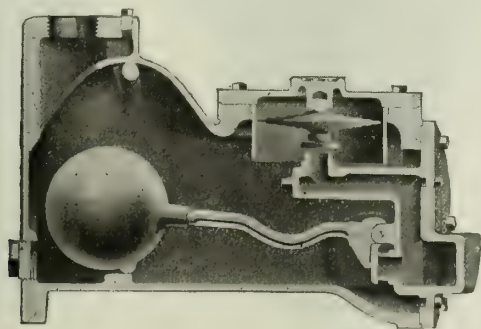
DUNHAM NO. 6 BLAST TRAP
